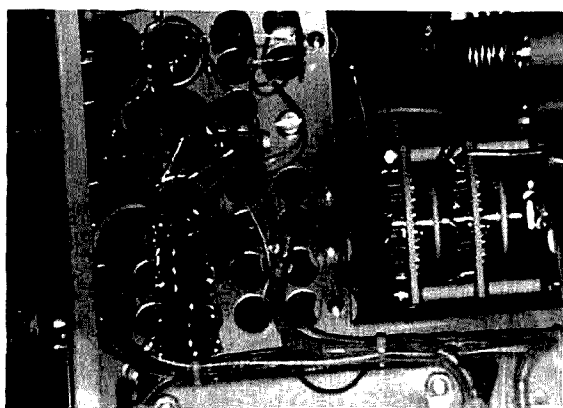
Installation of resistor packs clearly shown in spaces between tube sockets and wiring harness. Note remounted terminal strip for grid shunt and meter multiplier at top right of photograph.
